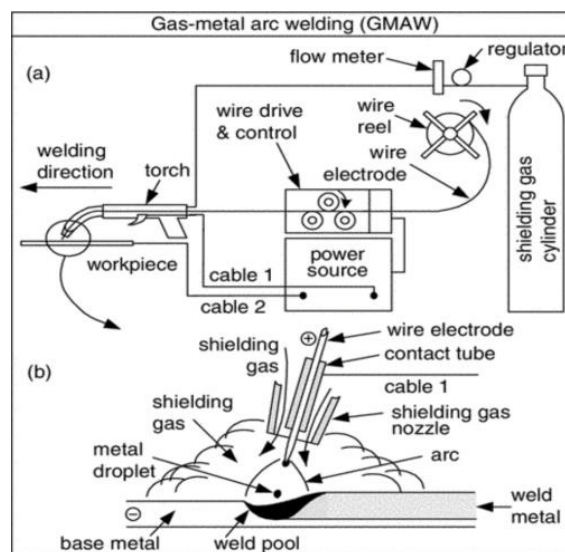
Metal inert gas welding: (a) Overall process, (b) Welding area enlarged (Adopted from Kou, 2021)
